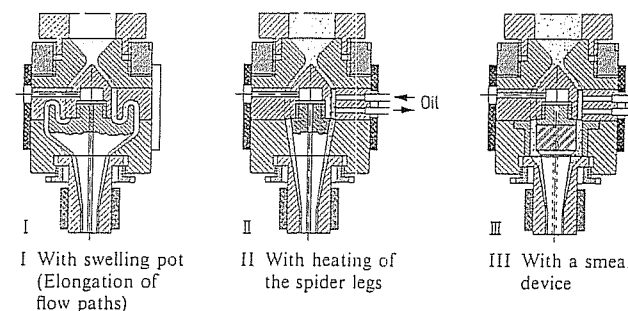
Center-fed mandrel support dies and different methods to reduce weld lines [85]
